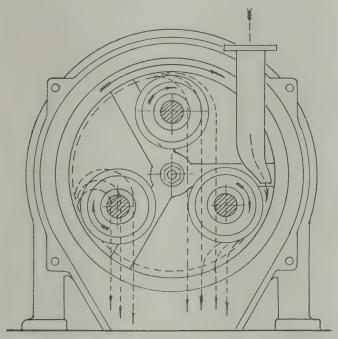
STURTEVANT RING ROLL MILL.
